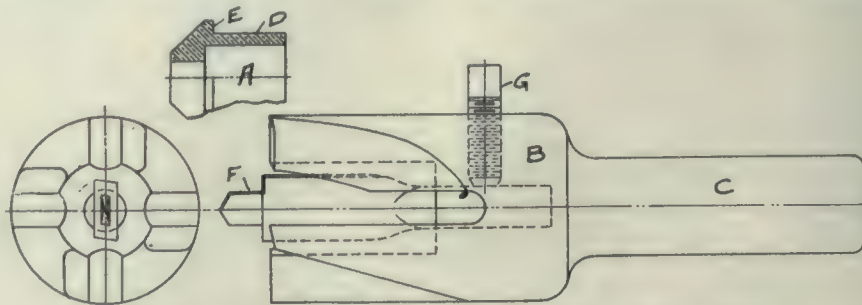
Hollow Mill for Making Nipples on the Turret Lathe.
